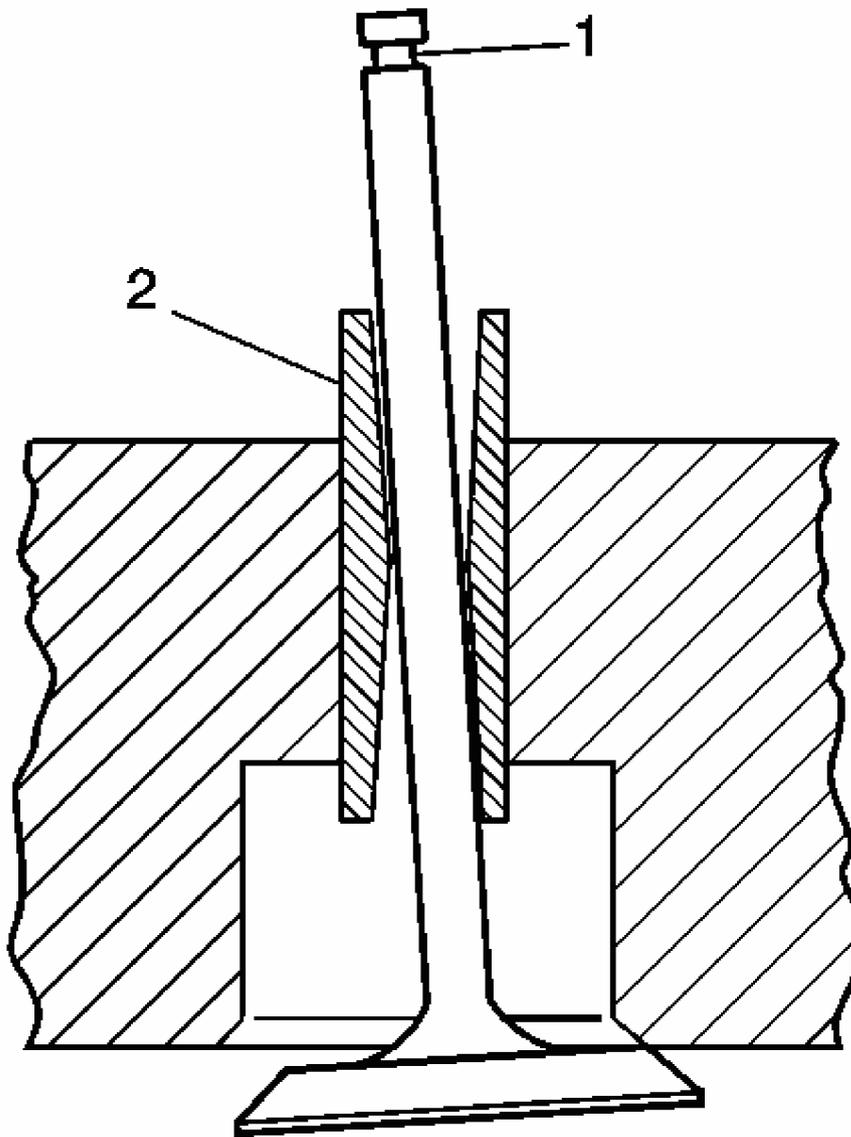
Inspecting For Excessive Valve Stem To Guide Clearance
